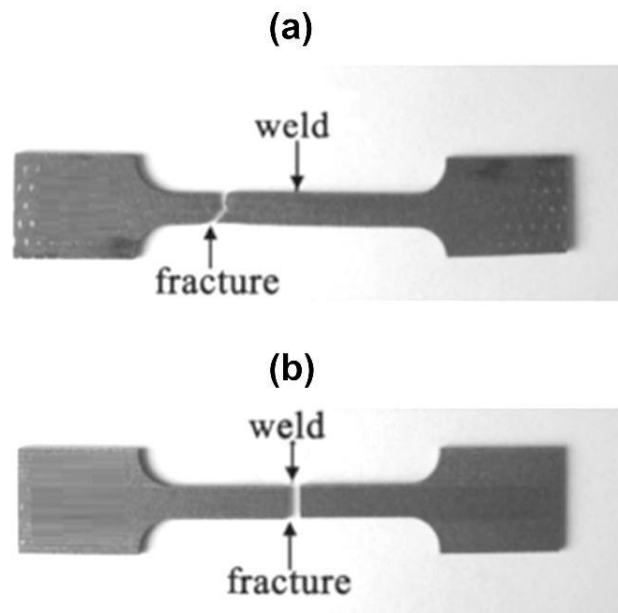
Tensile fracture location in (a) an integral weld and (b) a non-integral weld⁶⁸.
